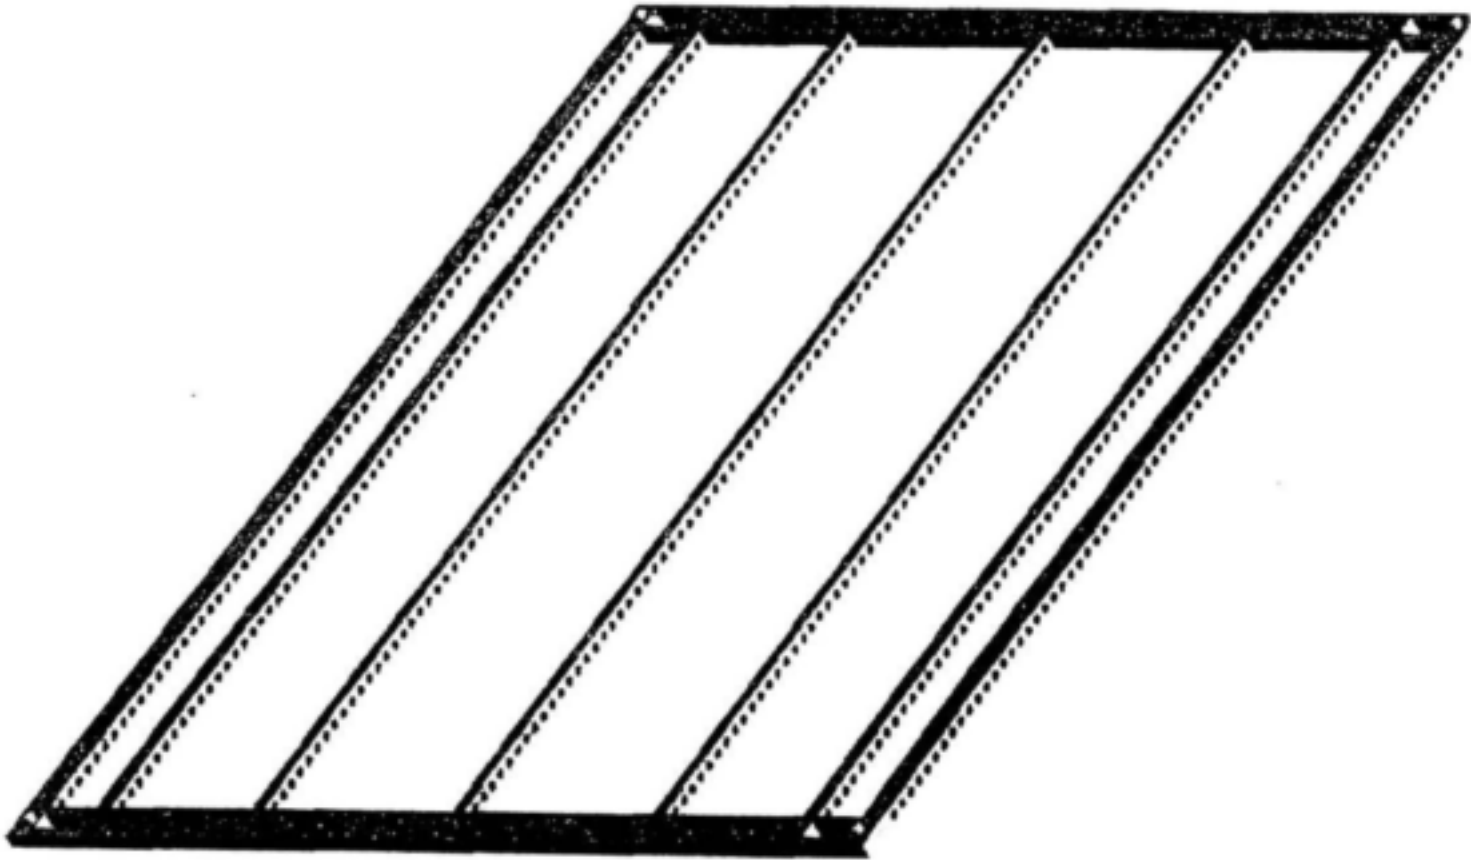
3-DIMENSIONAL VIEW OF SIMPLIFIED INNER SPACER REDUCED IN SIZE, AND WITH LOCATING HOLES
